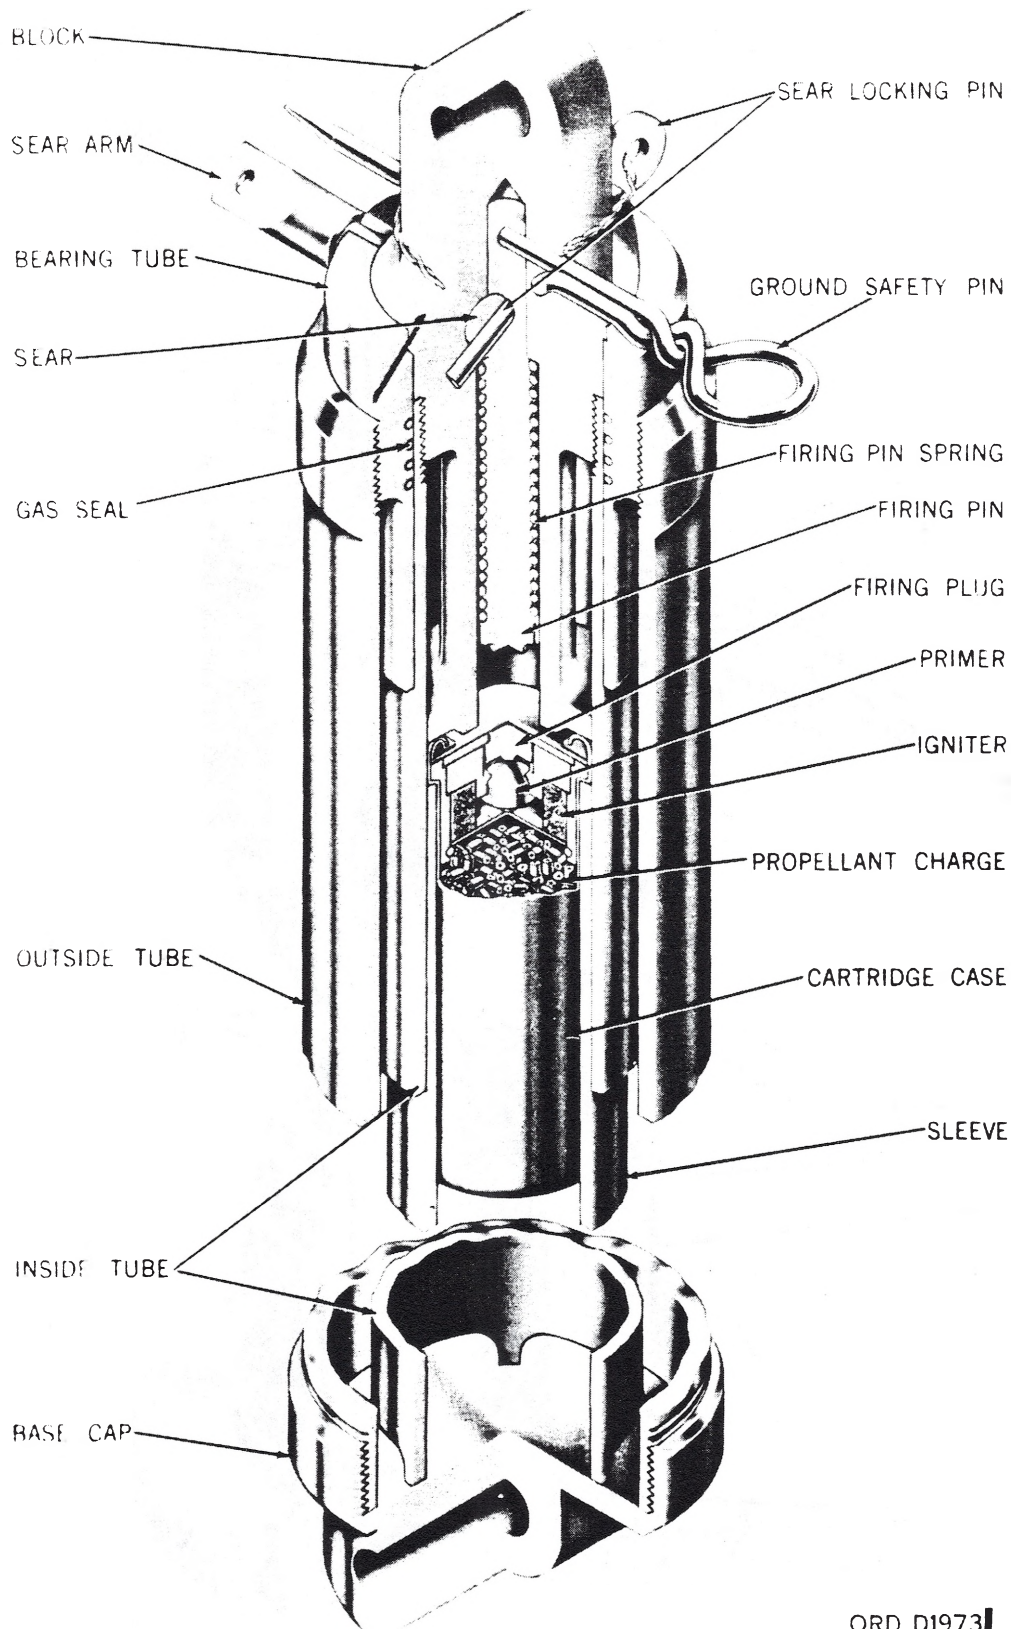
Remover M1A1 Assembled with Exactor M1—Unarmed Condition—
